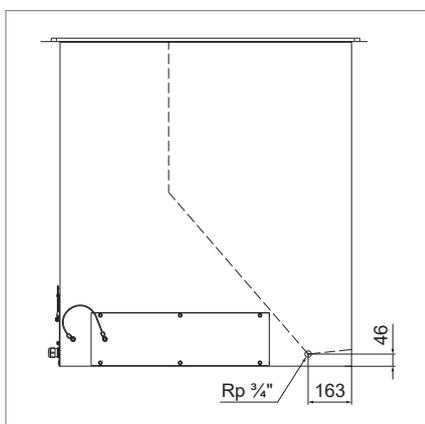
Dimensional drawing for oil/condensate drain (in mm) for oil-proof design and corrosion-protected design for high extract air humidity
